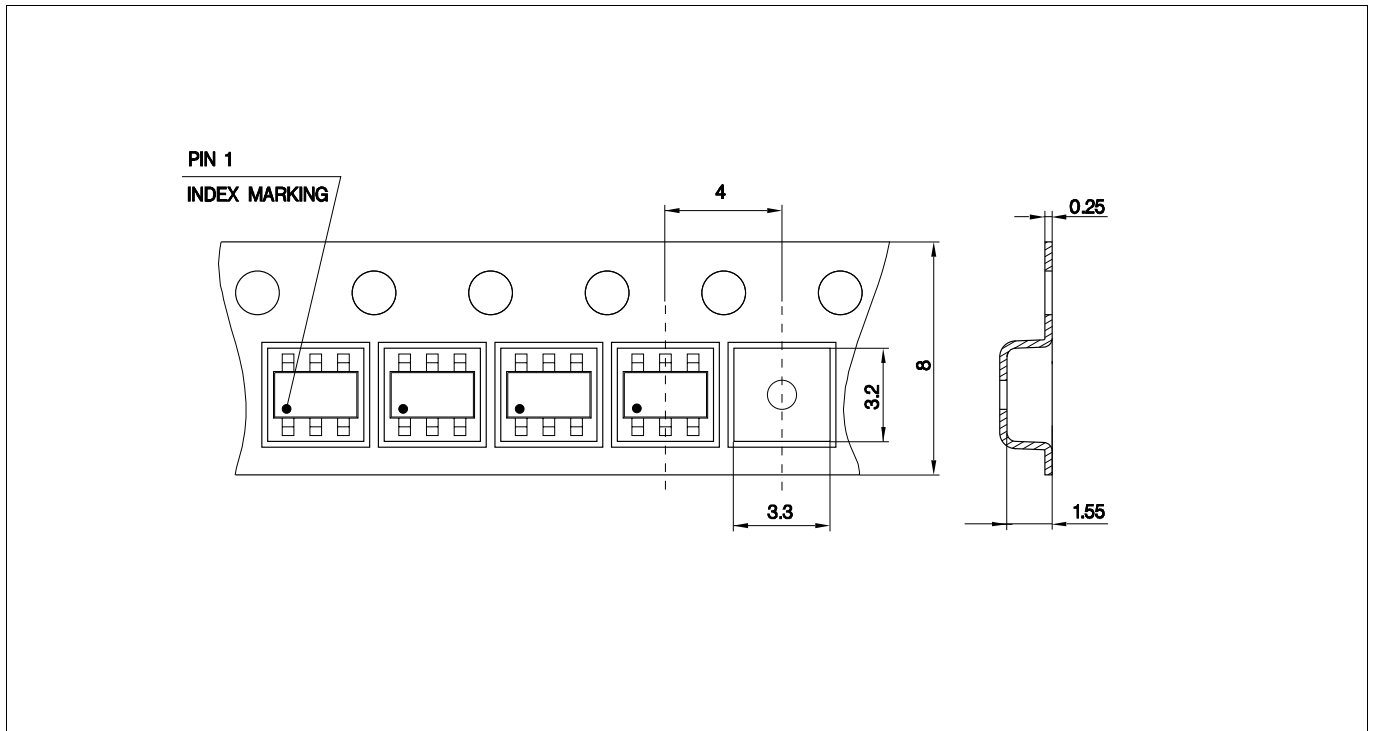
PG-SOT23-6-2 Packaging Dimensions
